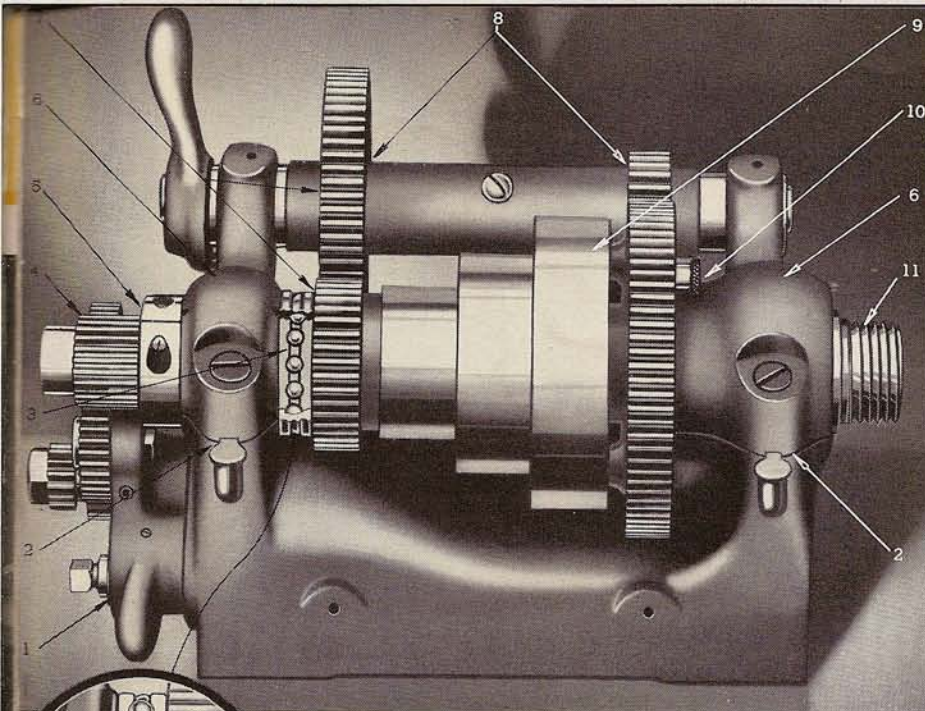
Above—"Workshop" Lathe Headstock with Guards Removed
